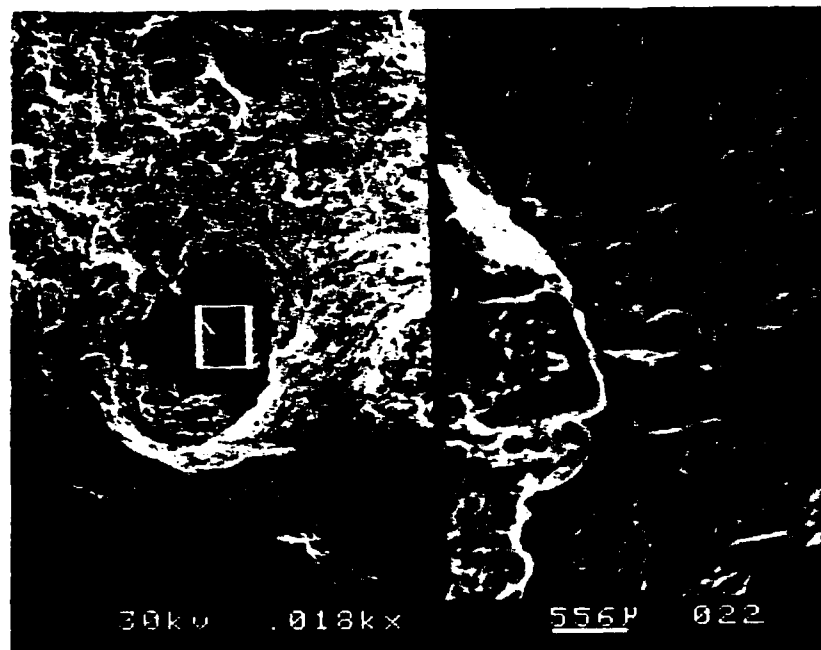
Porosity observed on the fracture surface of the no-HIP sample at 18X. A magnified view of the pore at 180X.
